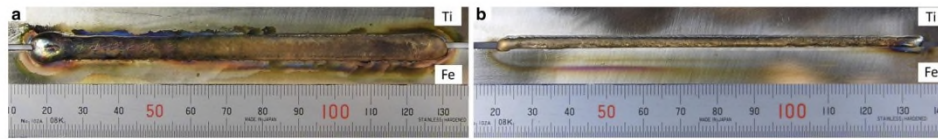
Weld bead stability and oxidation from sample CMT 11: a top surface and b weld root
